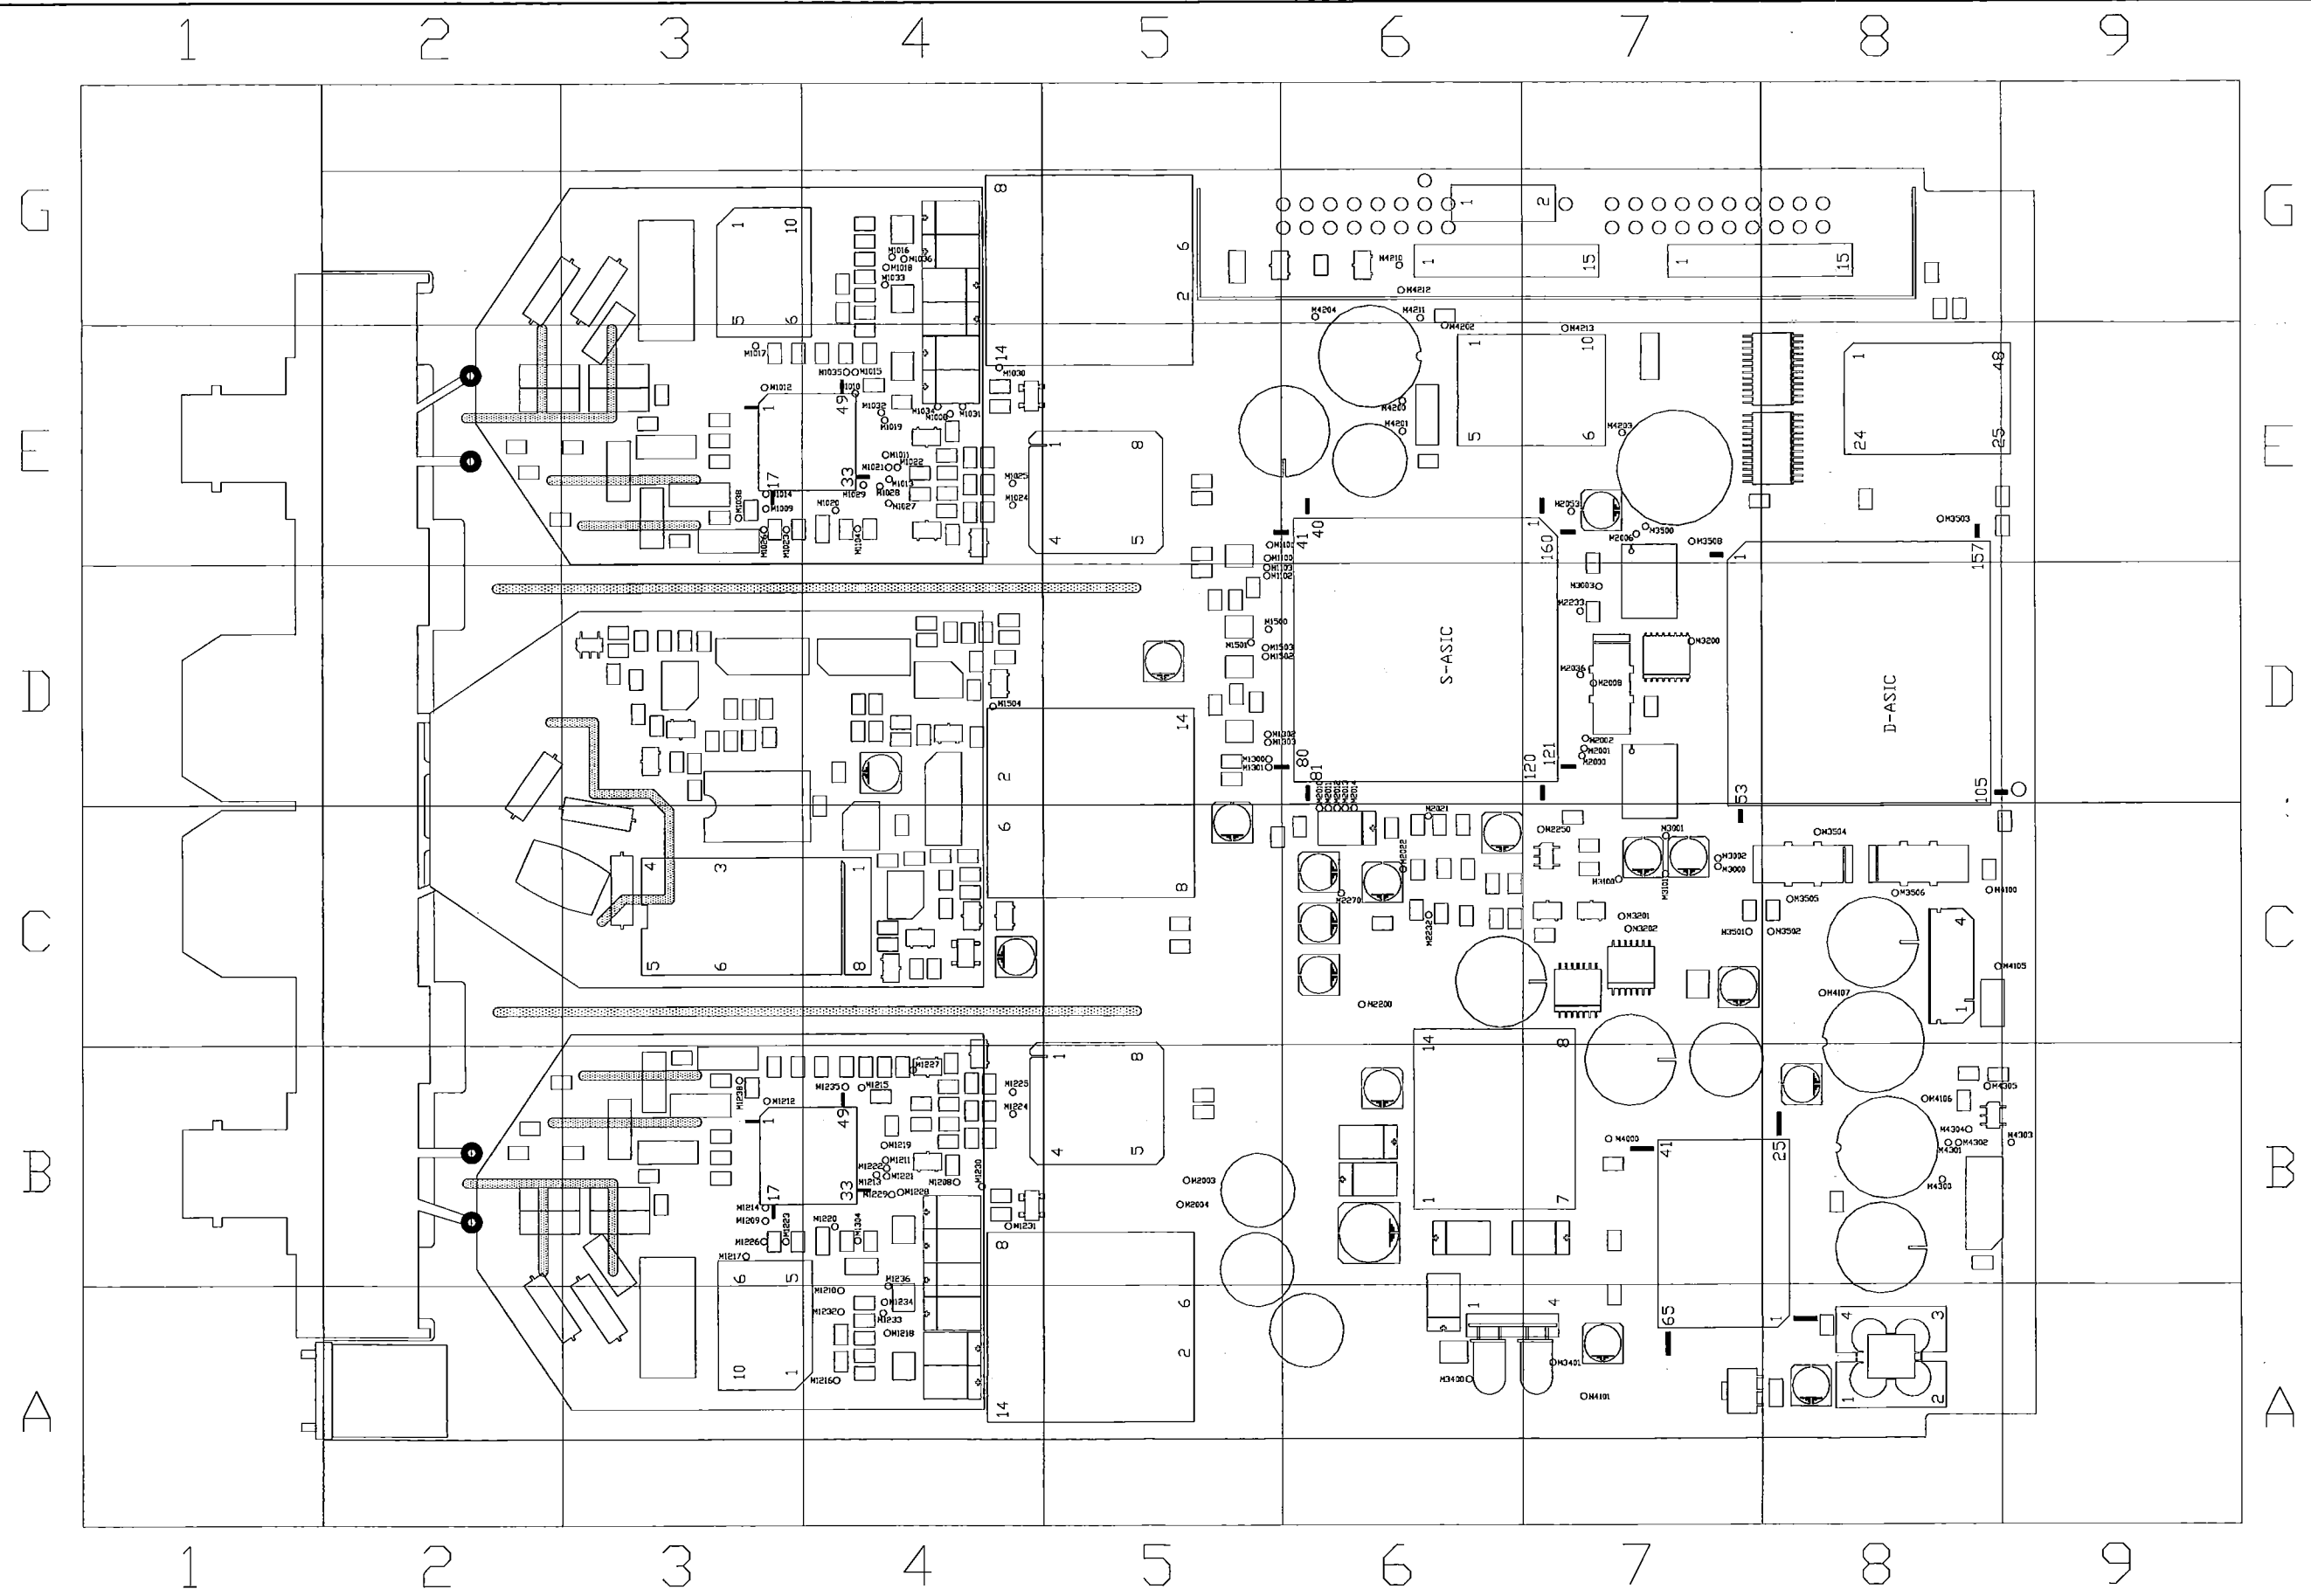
Main PCA Top View Test Spots PCB Version 5
